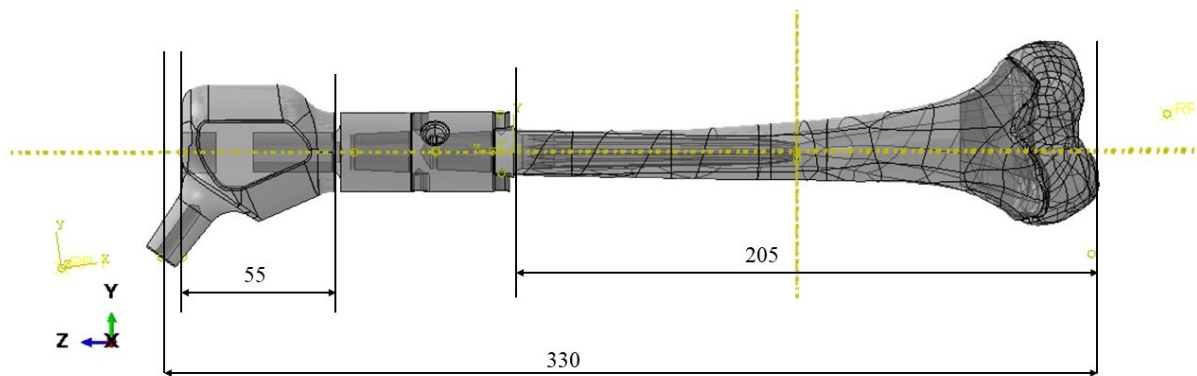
the dimensioned assembly corresponding to Configuration 3 with 100 mm stem inserted.
